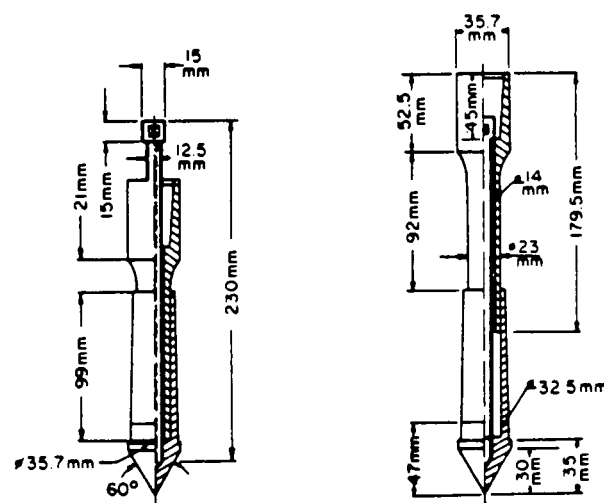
Example of a Mechanical Cone Penetrometer Tip (Dutch Mantle Cone)
